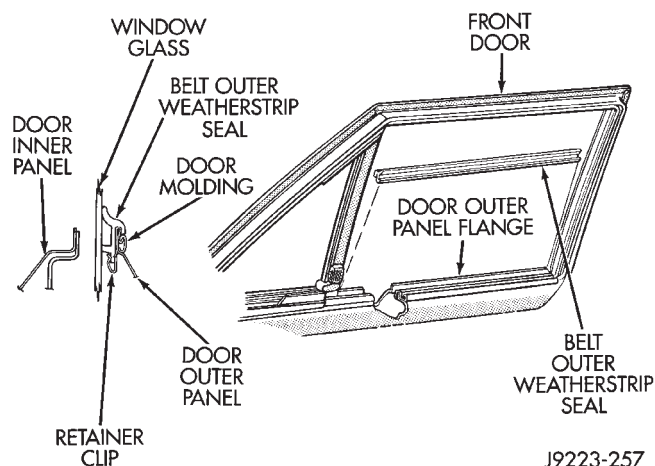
Front Door Belt Outer Weatherstrip Seal
